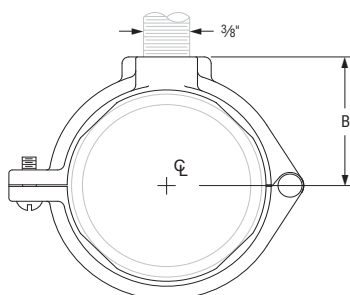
R: Loads (lbs) • Weight (lbs) • Dimensions (in)
